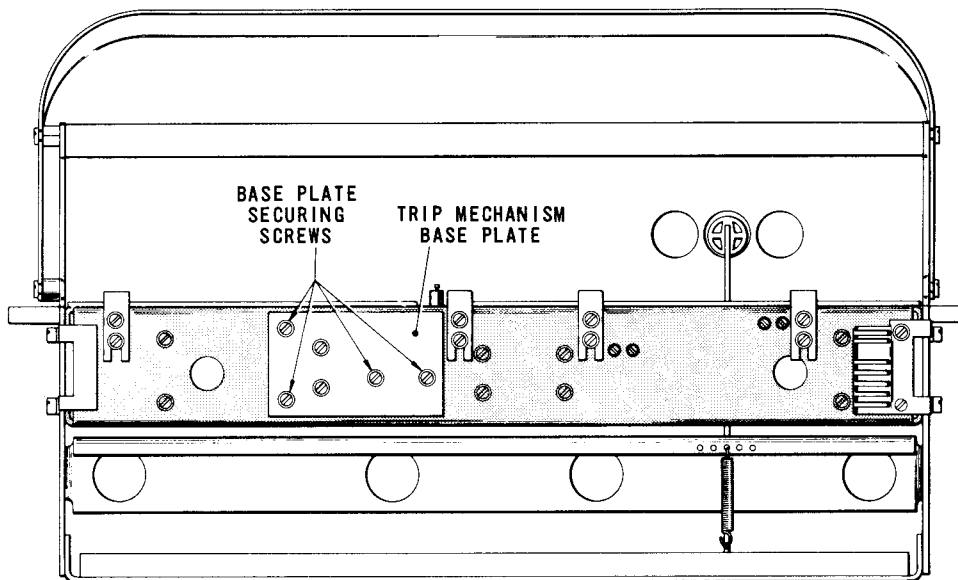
KEYBOARD—UNDERSIDE VIEW
